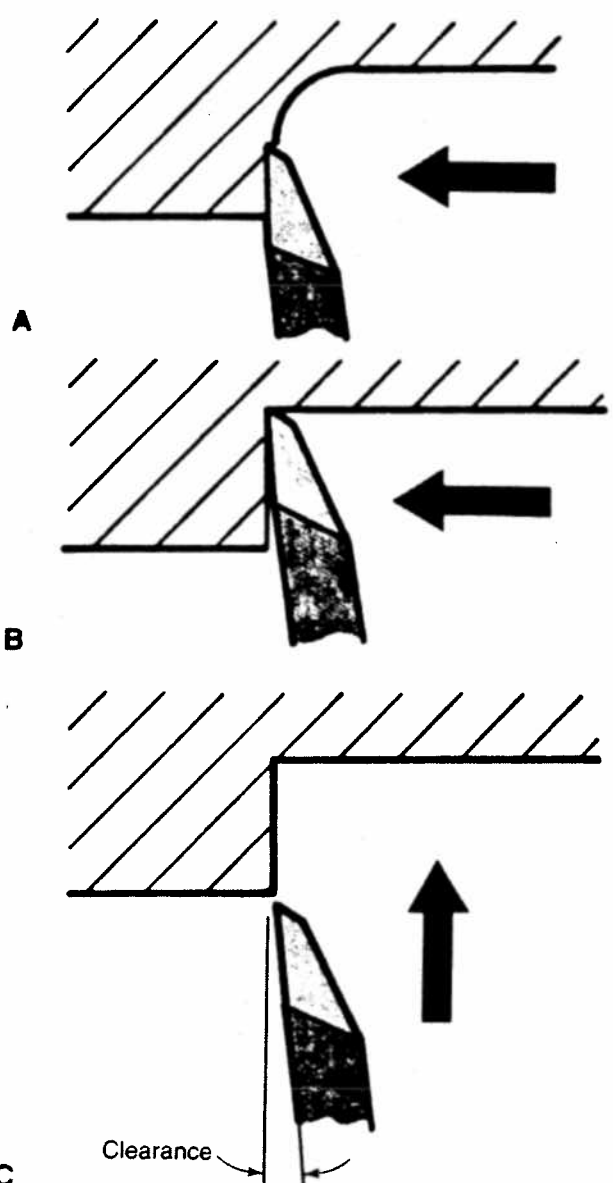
Machining sequence used for cutting a square shoulder. A—First cut. B—Second cut. C—Facing cut.
